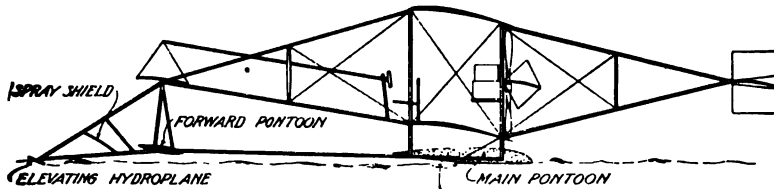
Side Elevation of Early Curtiss Hydroaeroplane
